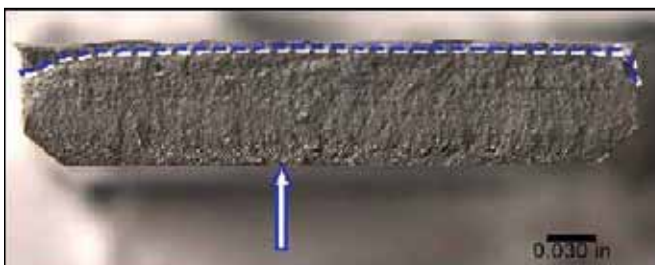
Fractograph of STBF test tooth. The blue dashed line represents the extent of fatigue propagation, and the arrow indicates the fracture origin.
